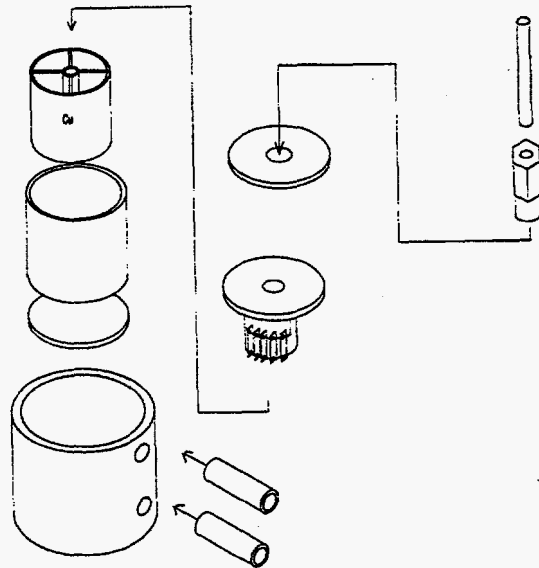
Schematic of a canister used to house specimens in the spallation neutron environment.
